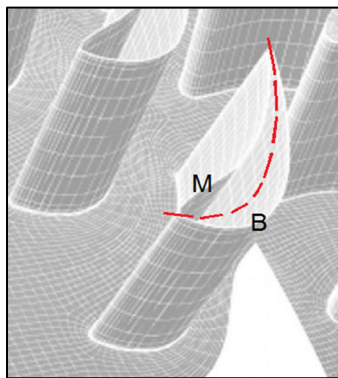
The way of cutting of cored, thin-walled part of the turbine blade casting
